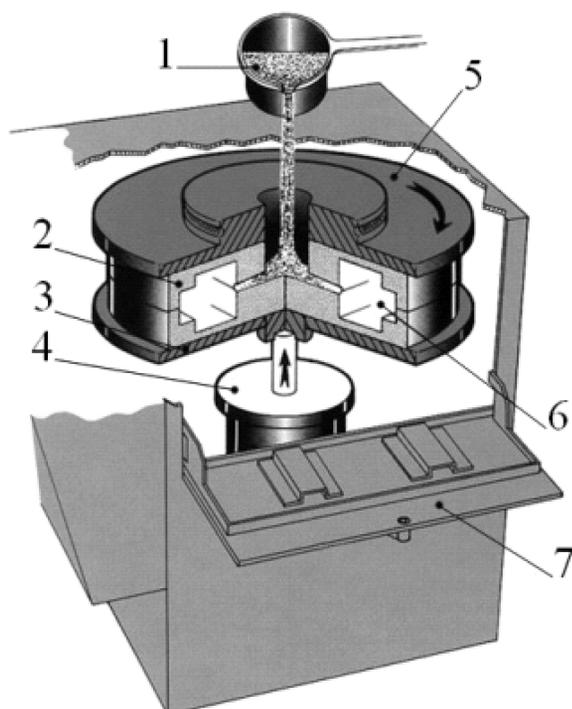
Scheme of the process of centrifugal casting method Tekcast [3], 1 - molten metal or plastic in a liquid state, 2 - silicone form 3 - bottom plate, 4 - air cylinder, 5 - top plate, 6 - shave of mold cavity, 7 - door
